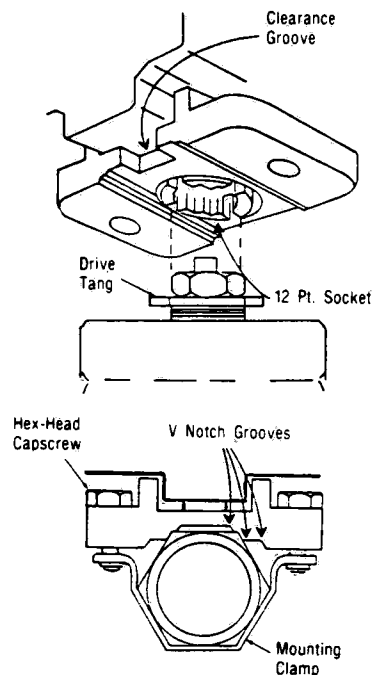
SOCKET-HEAD CAPSCREW LOCATIONS.
